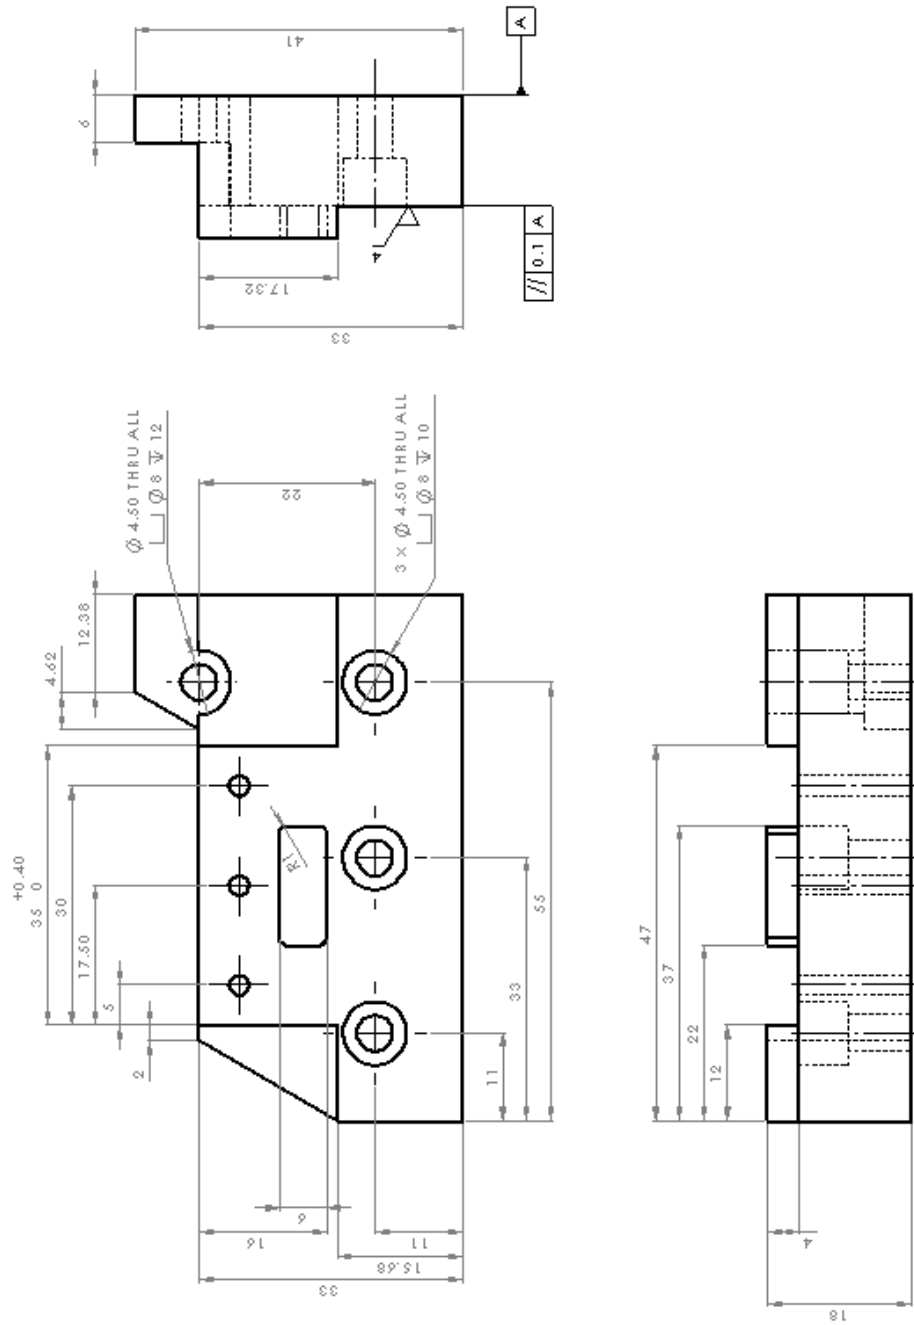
Technical drawing of the sample holder. Material Al7060.
